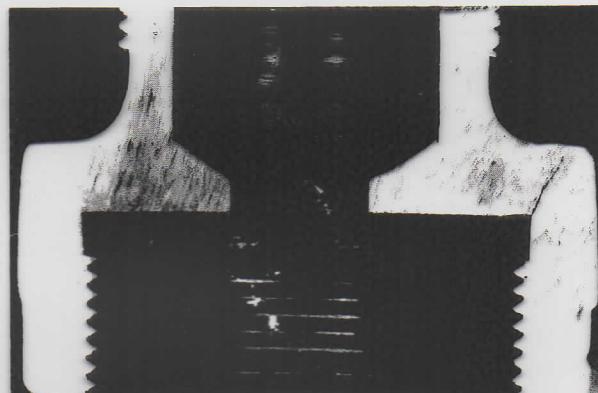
Sectional valve bonnet showing crack which originated at the sharply machined corner. (From R. D. Barer and B. F. Peters, "Why Metals Fail," Gordon and Breach Science Publishers, New York, 1970.)
